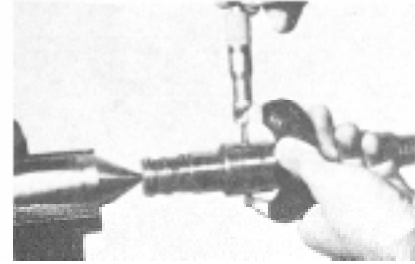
Checking Clutch Shaft Sliding Surface
